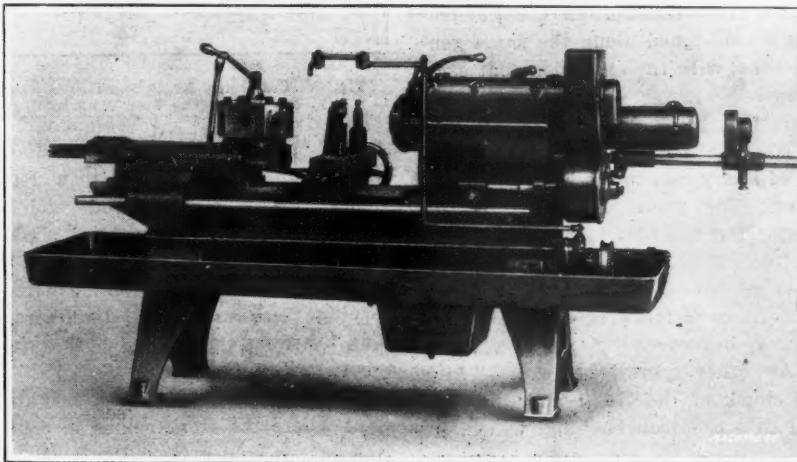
Rear View of Geared-head Turret Lathe illustrated in Fig. 1
